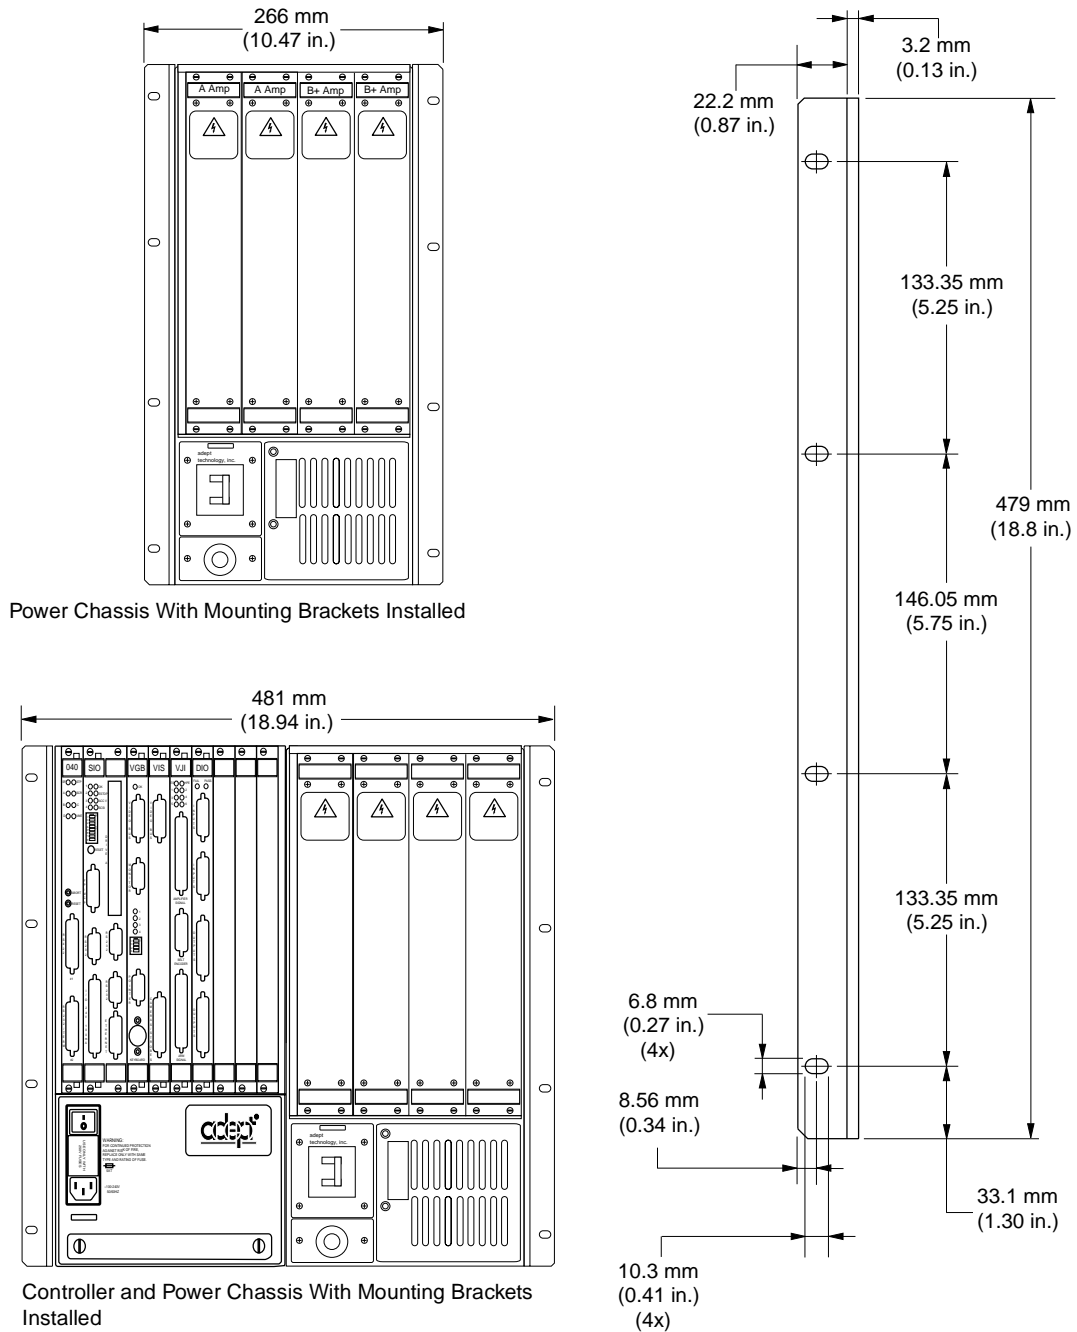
Controller and PA-4 Dimensions With Mounting Brackets Installed
